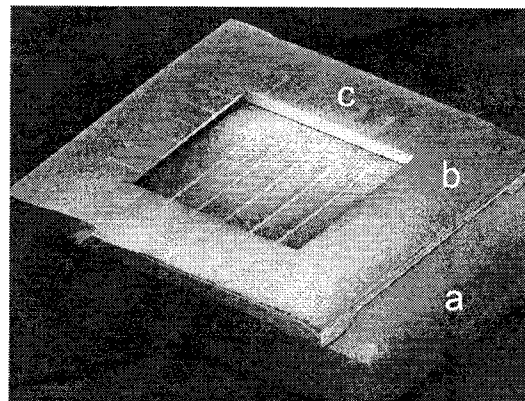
Intermediate chip with teststructures solder bonded to a glass chip. a: glass chip (emulating the transducer chip) with solder bumps, b: intermediate chip with vertical feedthroughs and top surface metallizations on top and bottom side, c: Electrical frontside to backside interconnections termination for further stacking.
